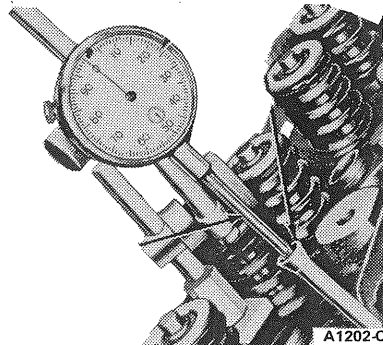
Typical Camshaft Lobe Lift Hydraulic Valve Lifters — V-8 Engine
